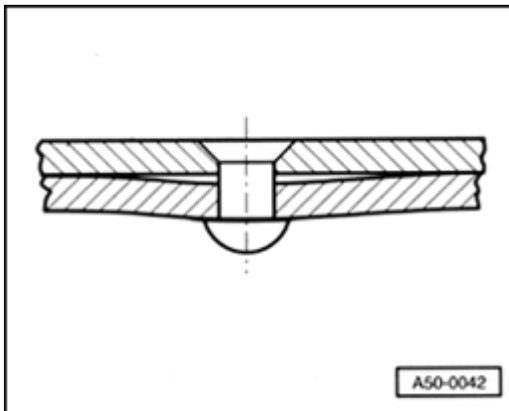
Identifying Rivet Material Is Pushed Into Gap And Causes Bending Stress To Rivet
